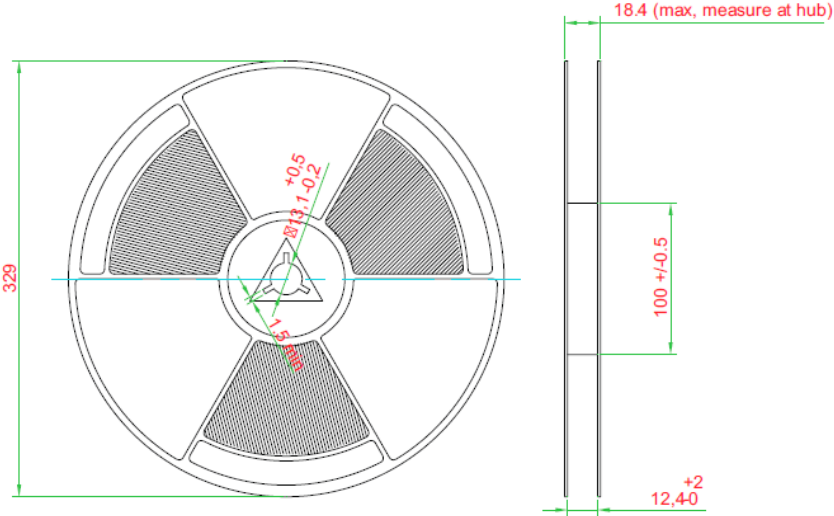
Reel dimensions for LUXEON 3535L Color Line.
